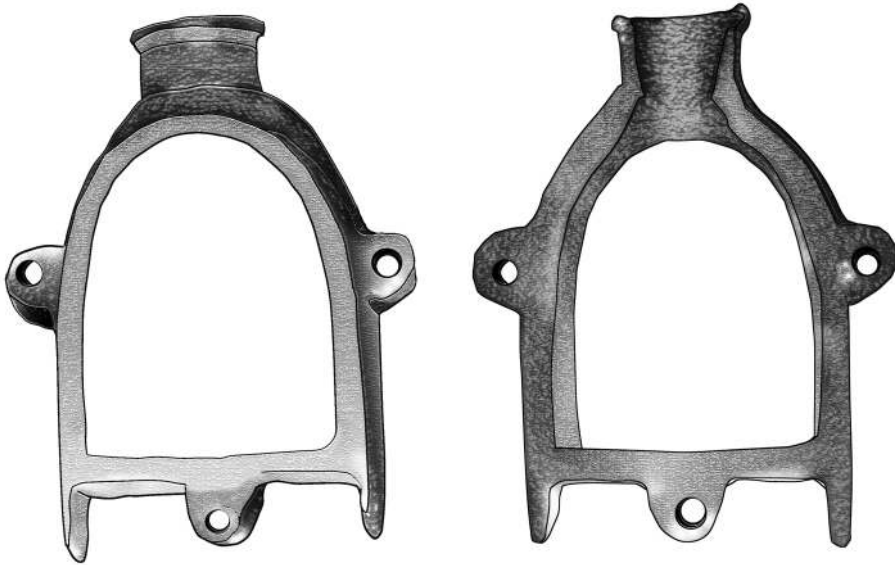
A stirrup-shaped metal sand casting flask with ingate at top and three lugs for locating pins. The projections at the bottom assist in positioning the flask upright for pouring in the molten metal.
